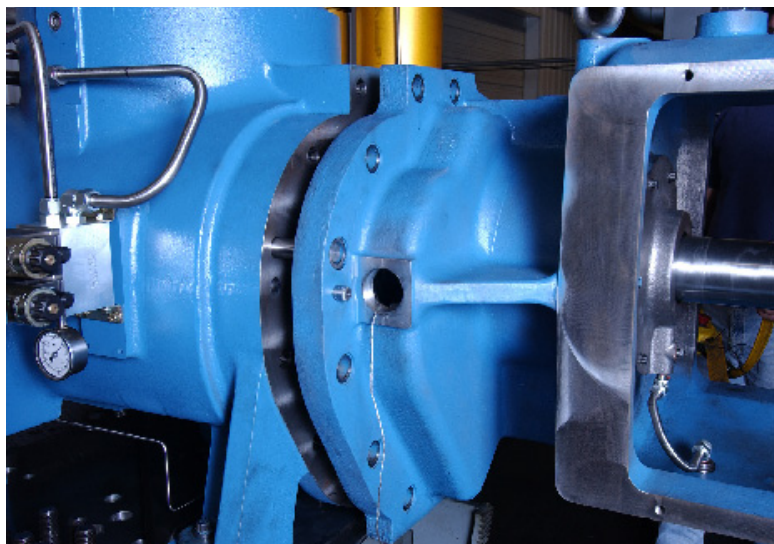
SEPARATING GEAR HOUSING FROM COMPRESSOR
